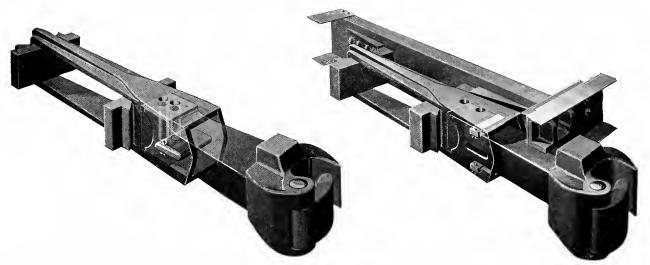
Forsyth Radial Yoke and Followers with Center Key for Engaging Drawbar Butt; Applicable to Any Standard Gear or Drawbar.
